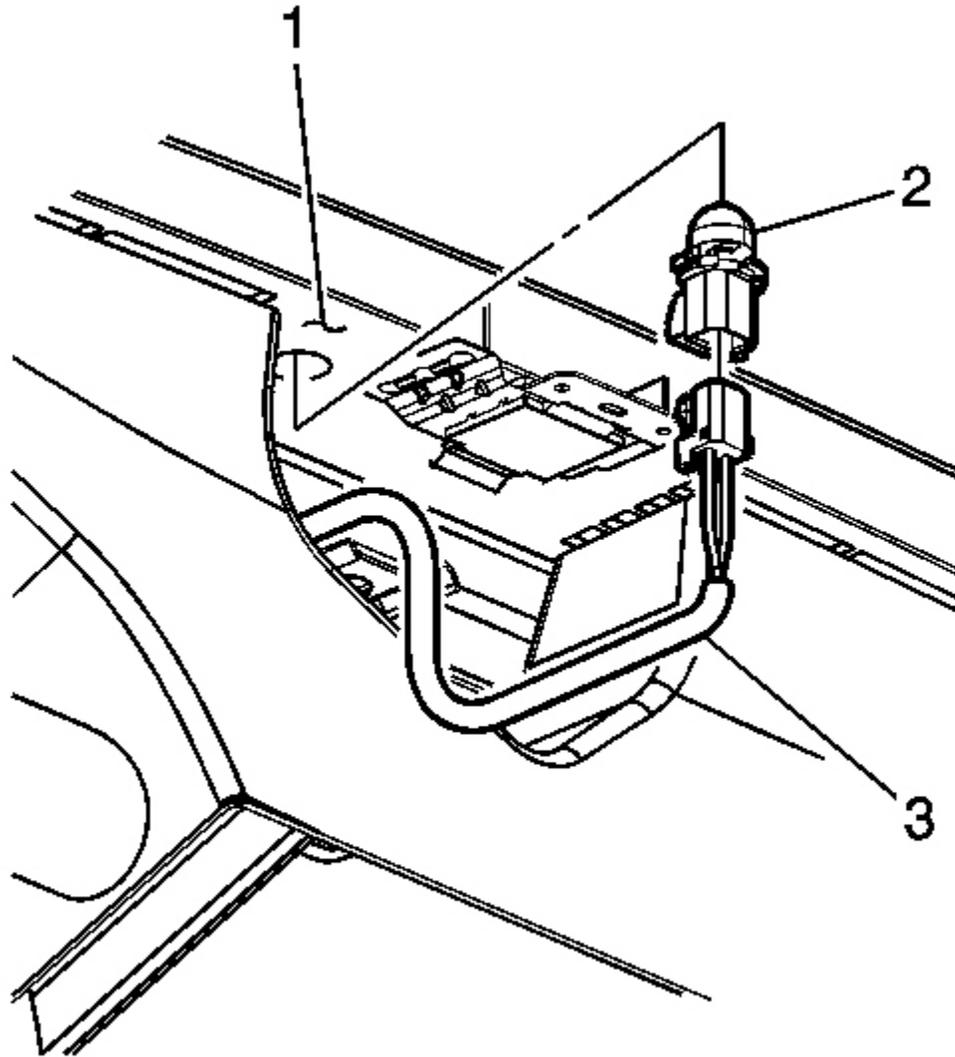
Sun Load Sensor & I/P Upper Trim Pad
